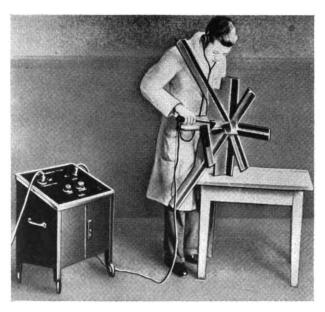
Using magnetic testing outfit to inspect welds in steel construction.
